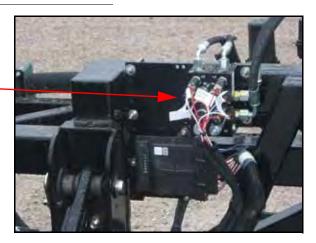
AutoBoom Valve Mounted on Valve Mounting Plate
